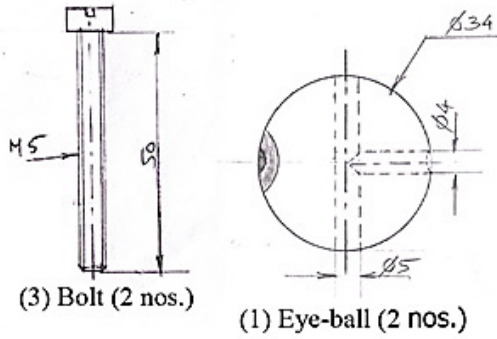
Drawing of Bolt and Eyeball with their part numbers and dimension
